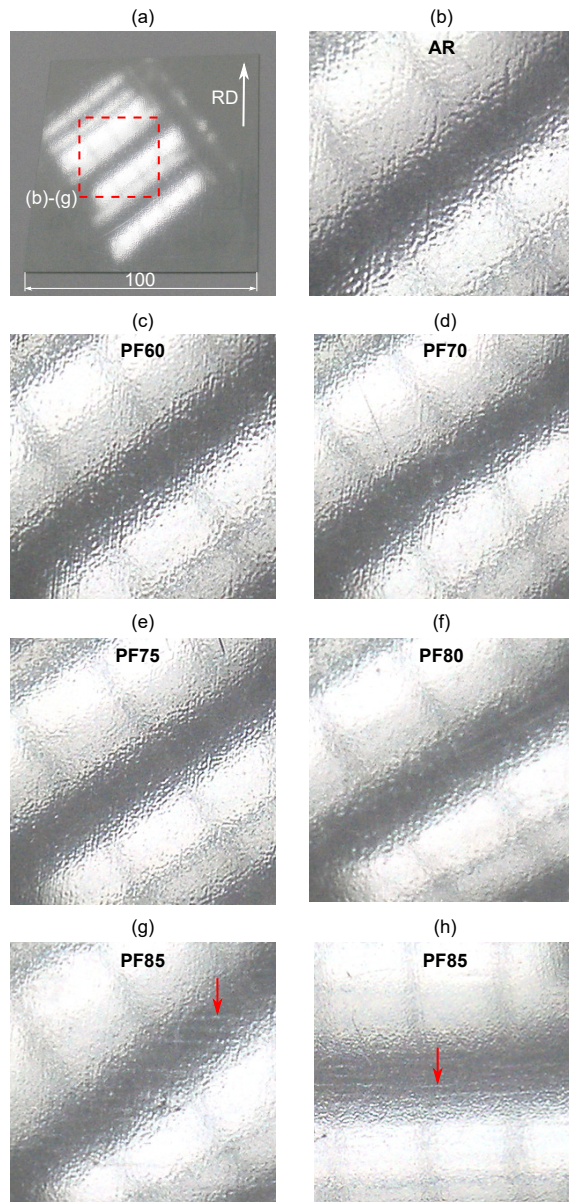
Surfaces of the roller-leveled specimens: (a) a part of specimen samples for the visual inspection under light; (b) as-received specimen; and (c)-(h) roller-leveled specimens processed with various PF conditions. (g) and (h) show the surface of the same specimen at different light angles. Red arrows indicate surface defects due to excessive roller-leveling.
